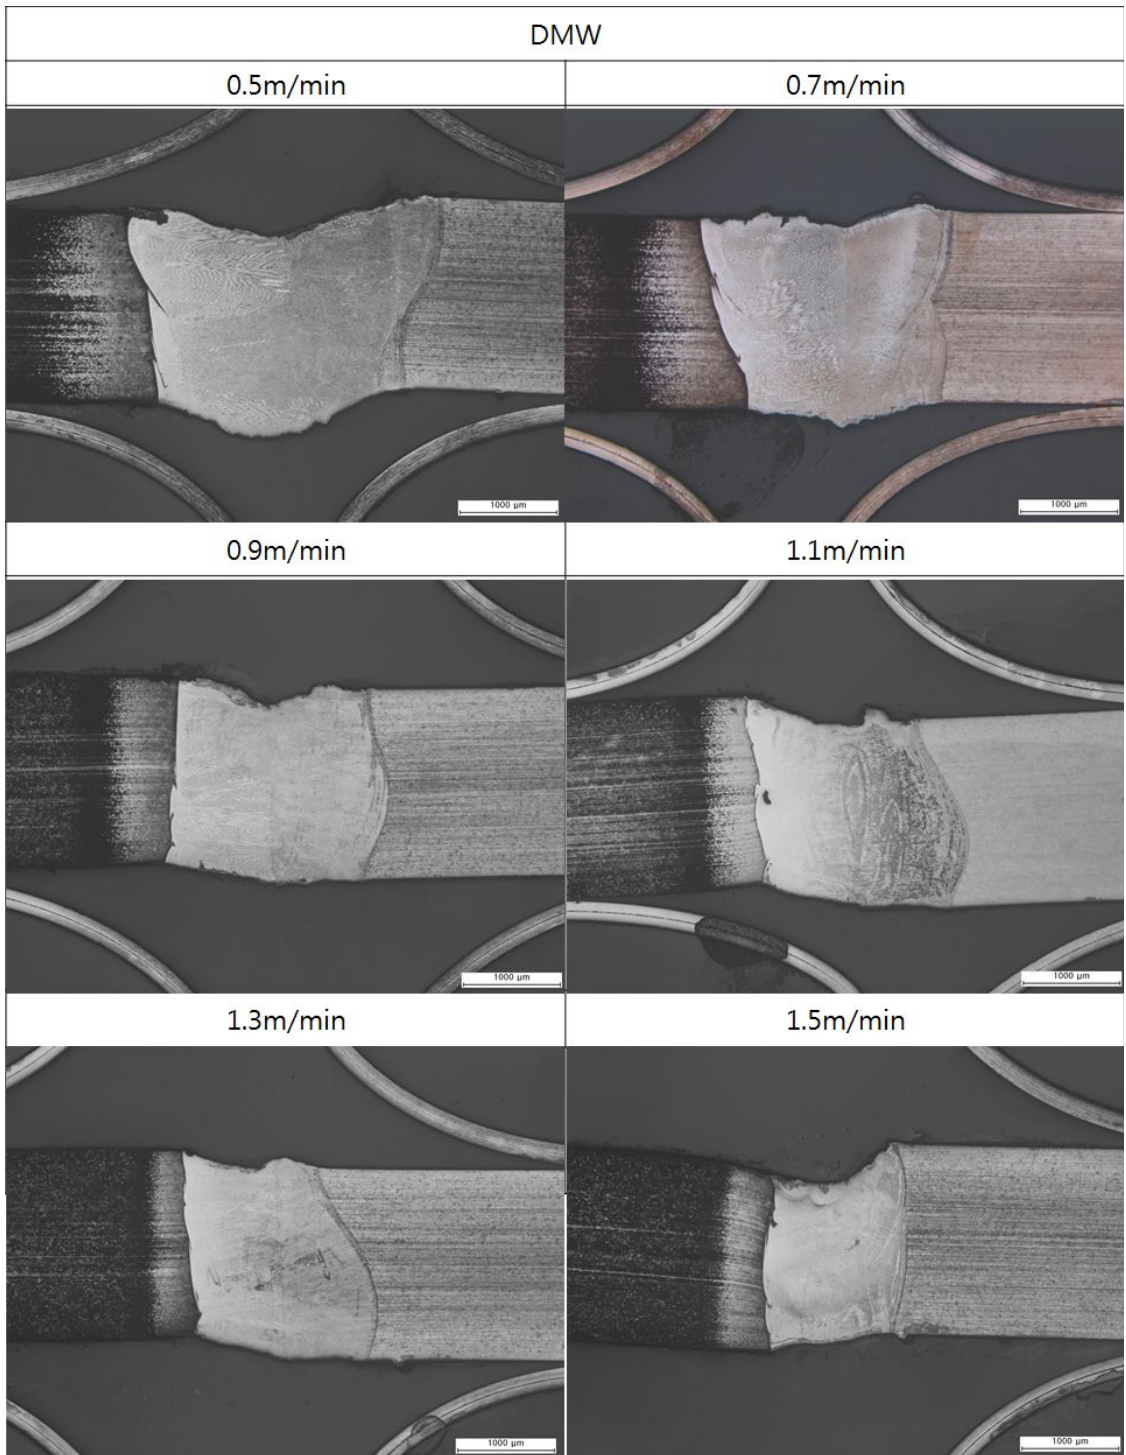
Welding cross-sectional area to variation of welding process parameters
